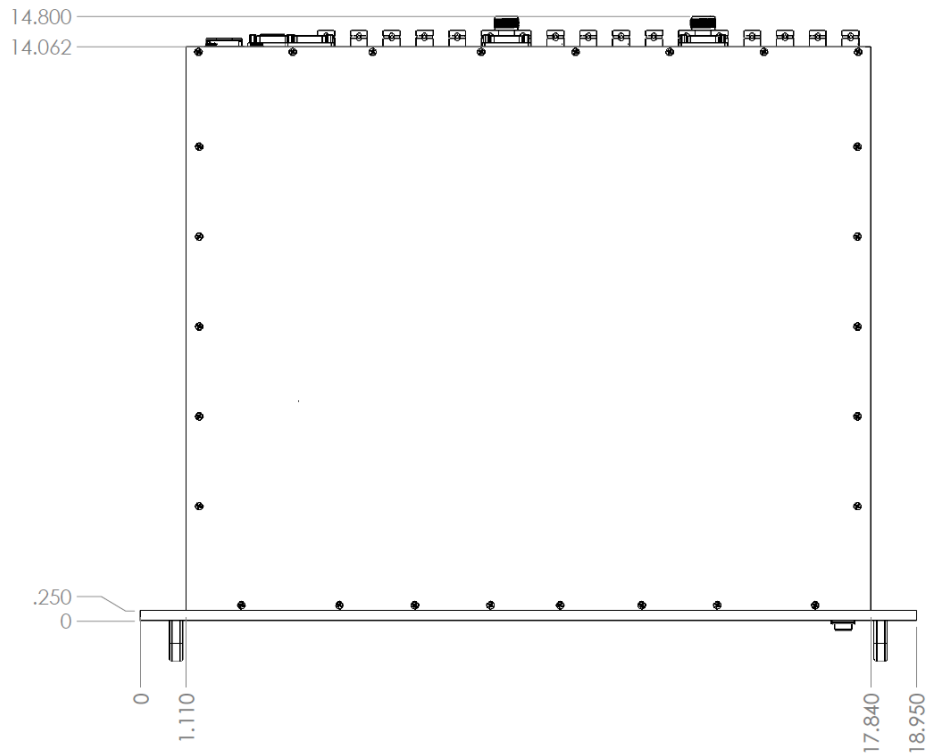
Mechanical Drawing – 3U Top View (Dual-channel Connectors Shown)
